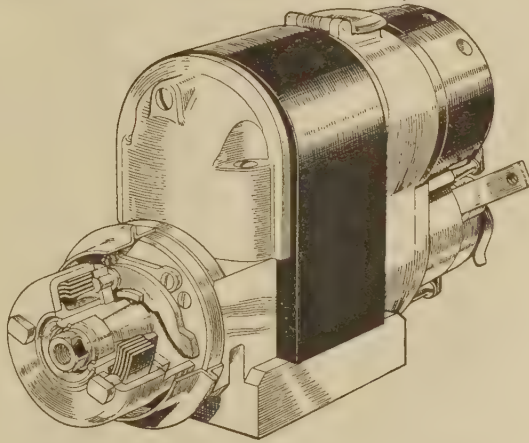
The Lucas G.J.4 Magneto, showing also the Impulse Starter.
